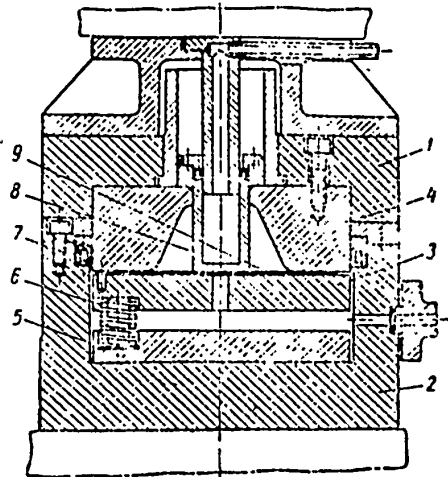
Section of a Die for Drawing Out Hydraulically
